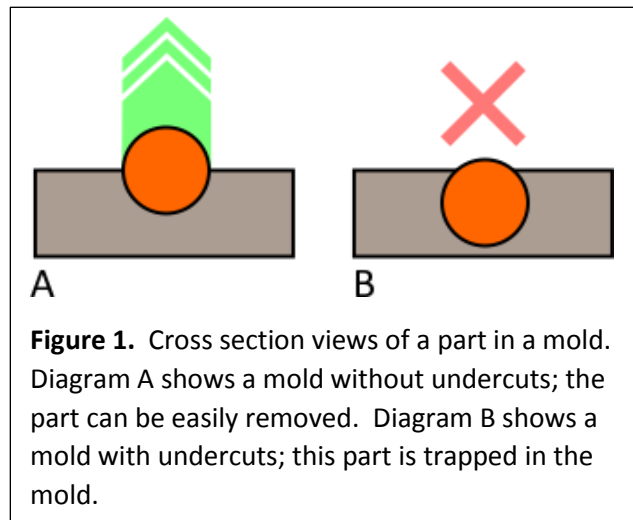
Cross section views of a part in a mold. Diagram A shows a mold without undercuts; the part can be easily removed. Diagram B shows a mold with undercuts; this part is trapped in the mold.
